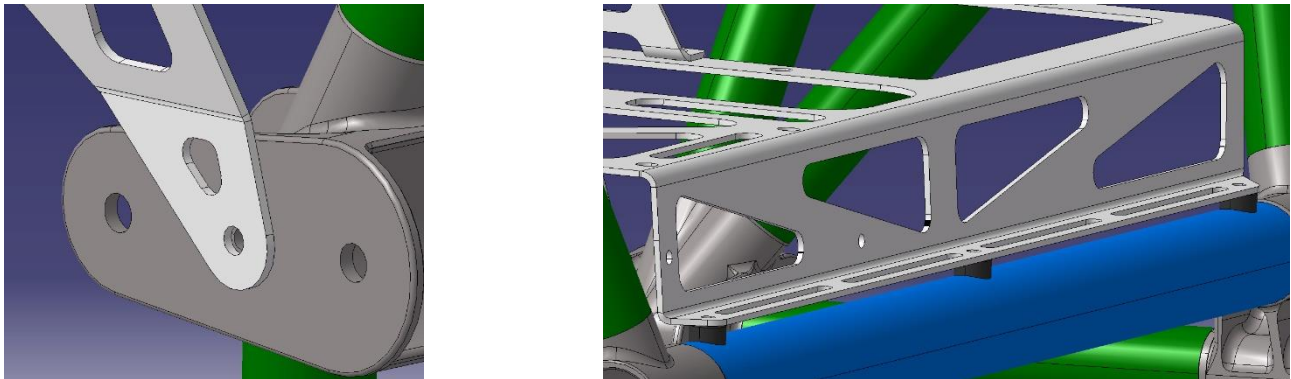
Left: Mounting of the Sheet flaps on the UCA Front Node; Right: Fixing of the Sheet on the Welded Bushings.
